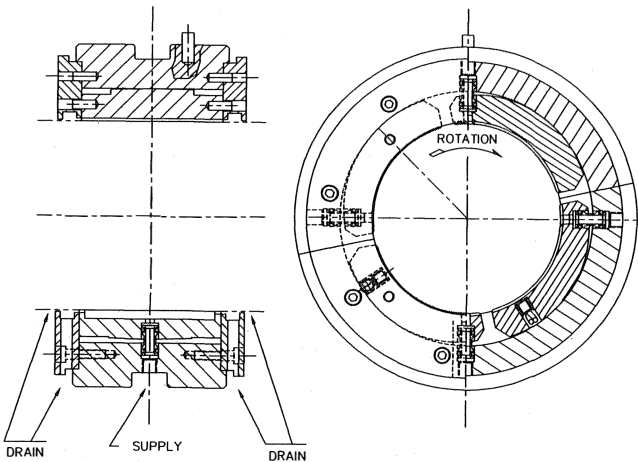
Leading Edge Groove Tilting Pad Journal Bearing.
